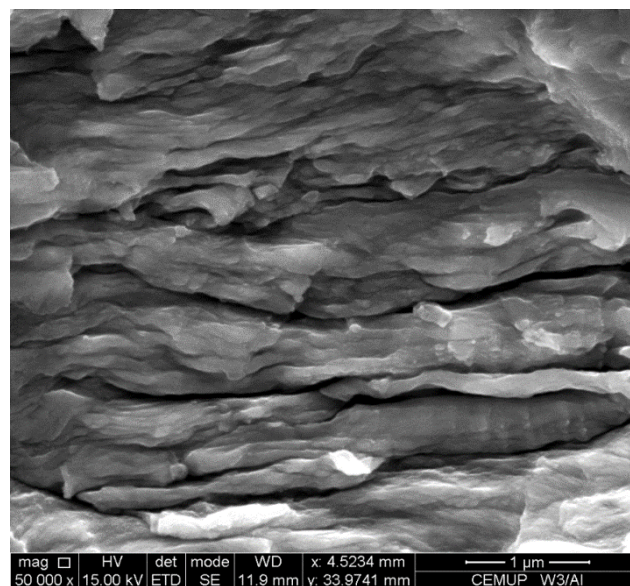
Fatigue crack striations observed with a Scan Electron Microscopy (SEM) on fracture surface of W₃ welded specimens (magnification: 50 000x).
